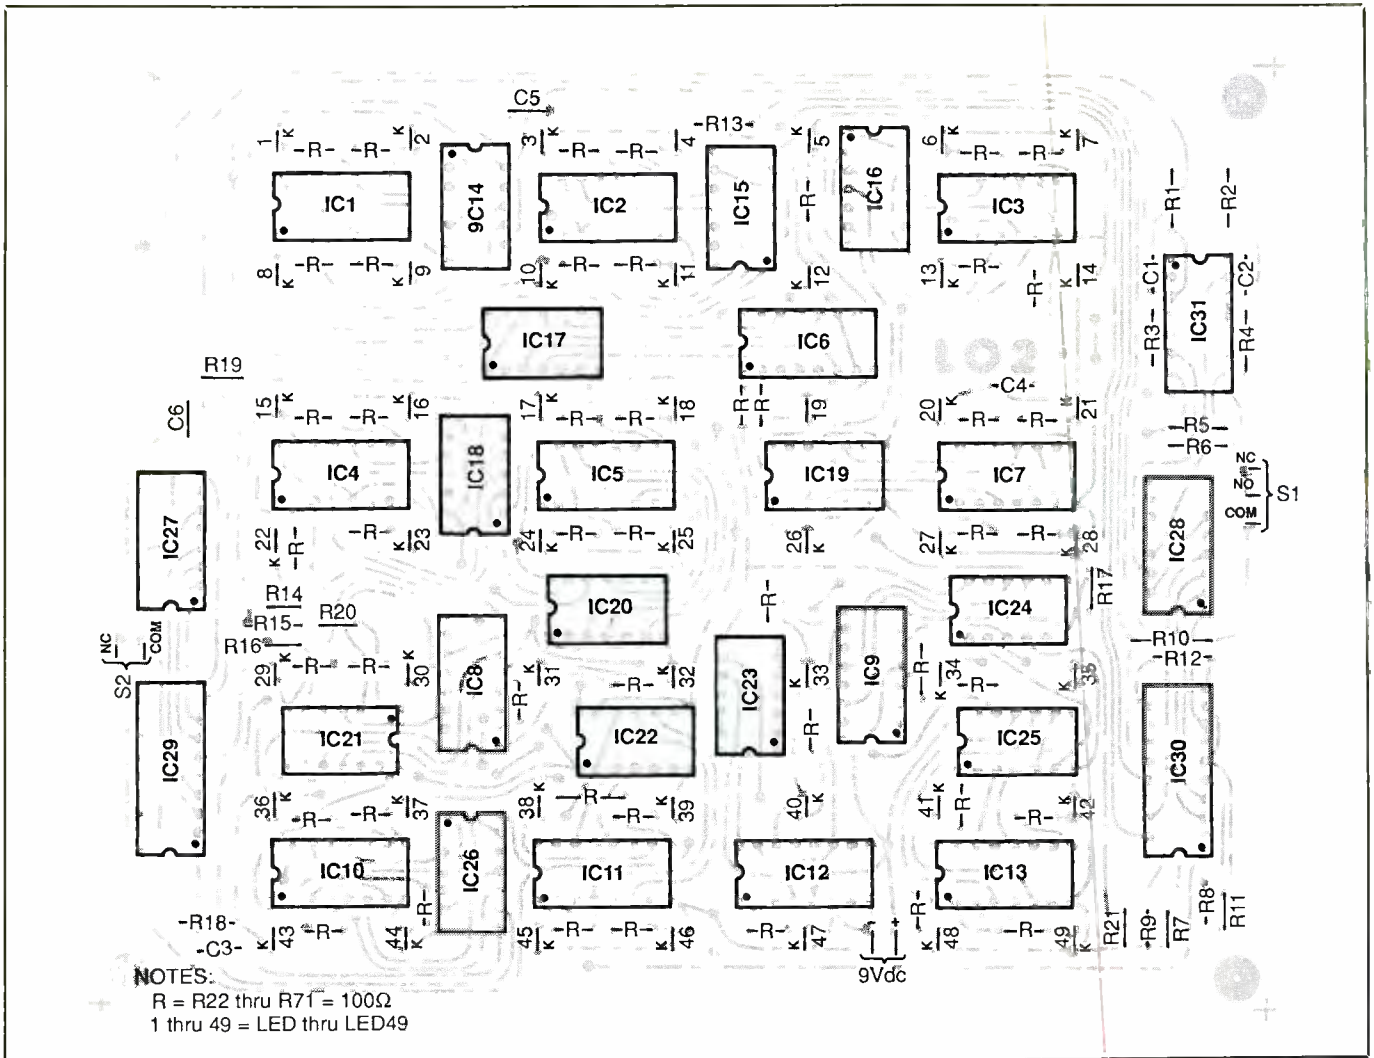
Wiring guide for pc board. Use this as a rough guide to laying out components if you opt for perforated-board construction instead of a pc board.
